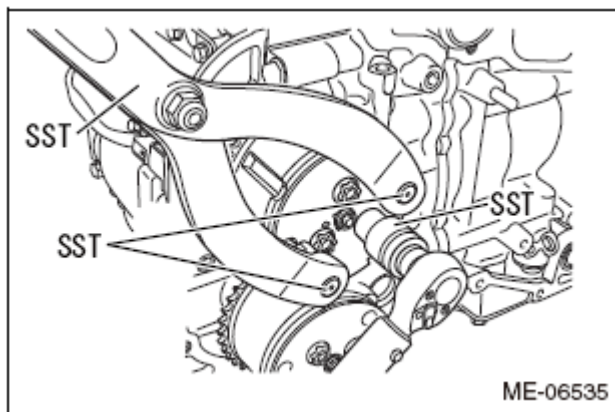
Securing Camshaft Timing Intake Gear Assembly Using SST
